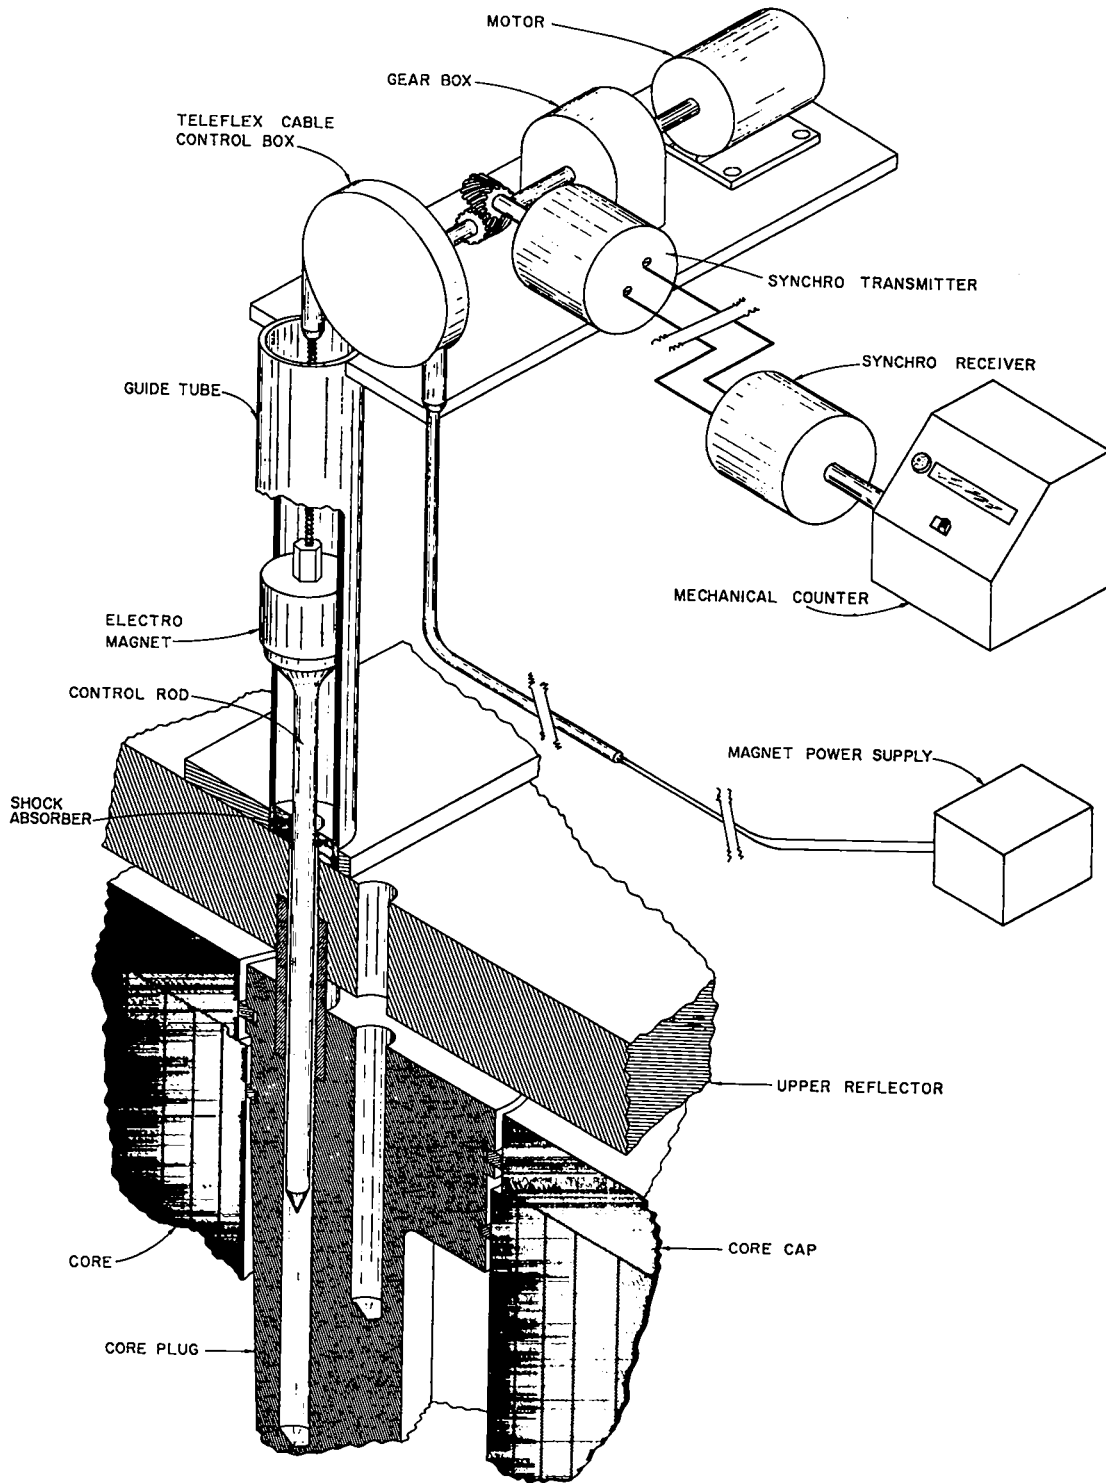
UCX control rod drive with scram mechanism.
